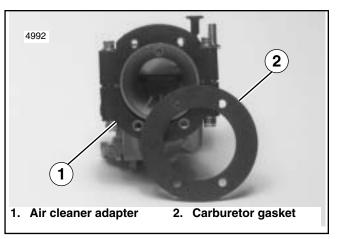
Air Cleaner Adapter and Carburetor Gasket
